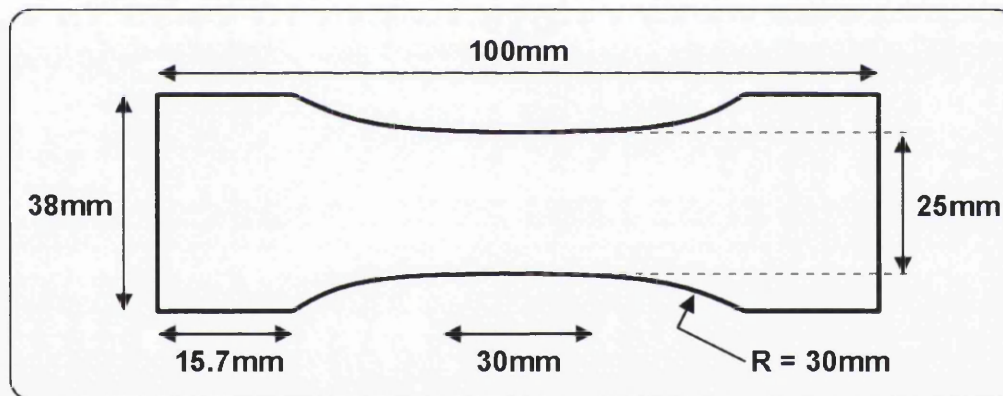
Schematic layout of the final Freestanding Coating tensile test piece design
